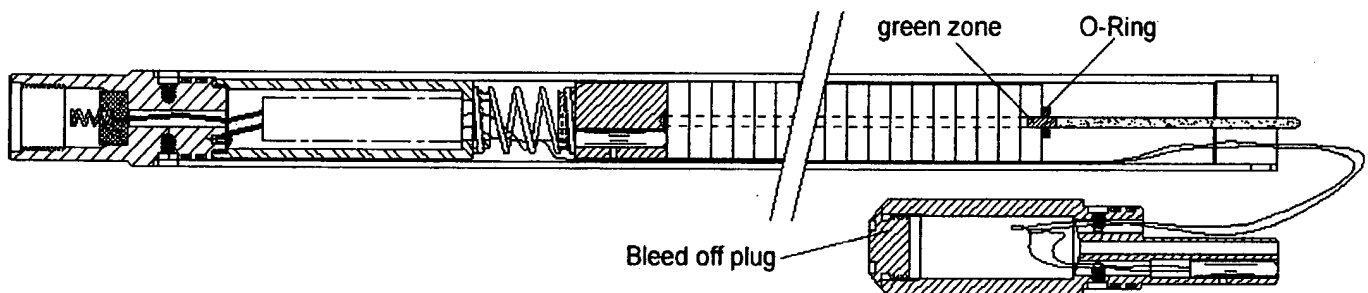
Slide Load Rod / Pellet Assembly into Housing.
